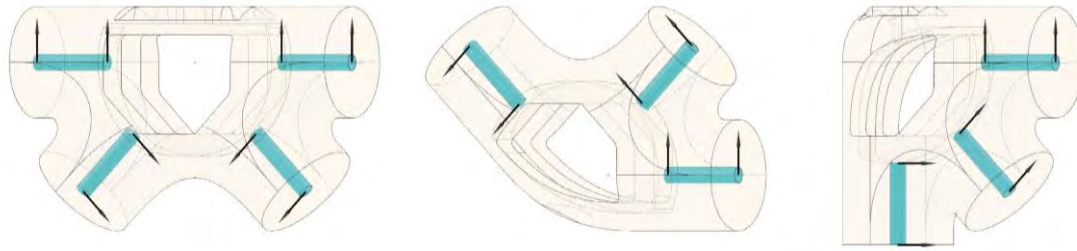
Displacement of outer moulded joint drill hole surfaces in local z-direction
